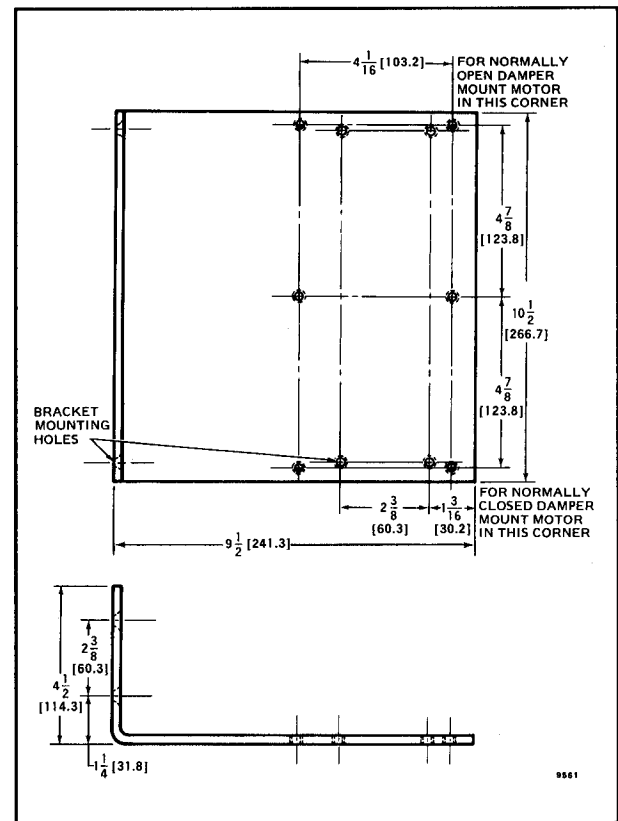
DIMENSIONS IN Ins. [mm IN BRACKETS] OF 308765-00027 INTERNAL MOUNTING BRACKET FURNISHED WITH Q605G.
